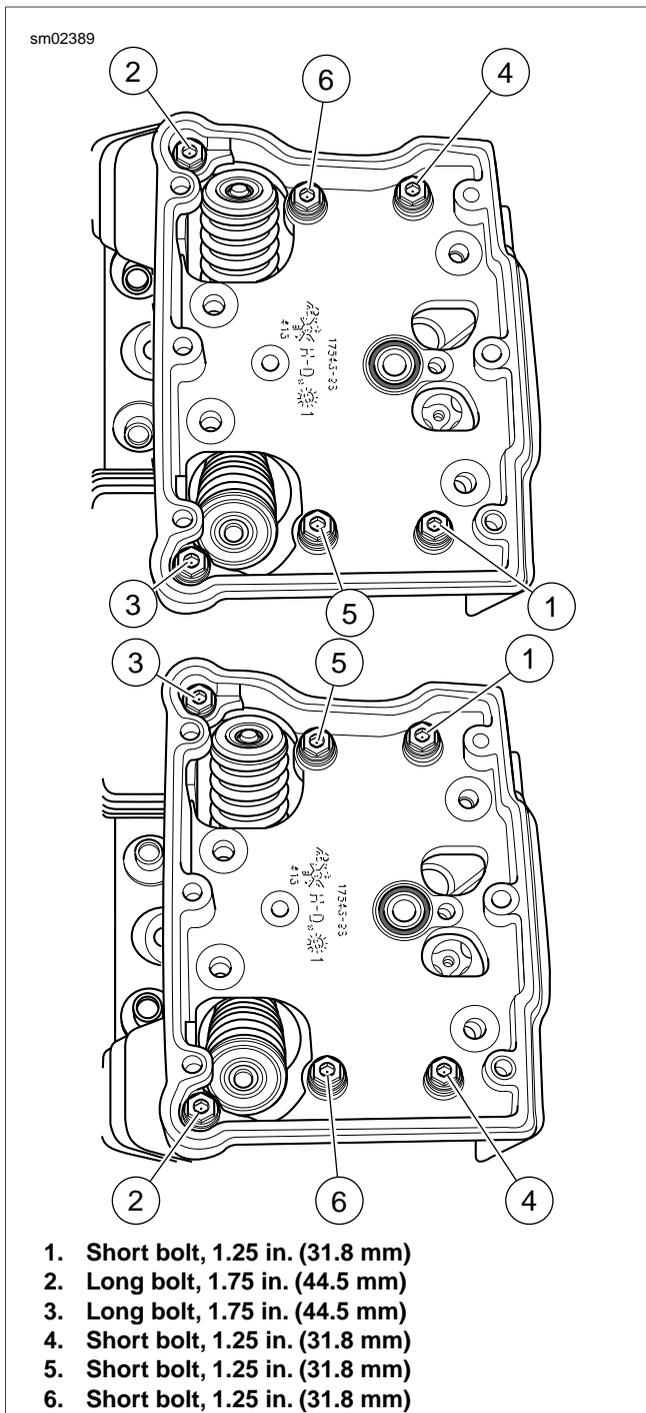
Rocker Housing Torque Sequence and Bolt Size
